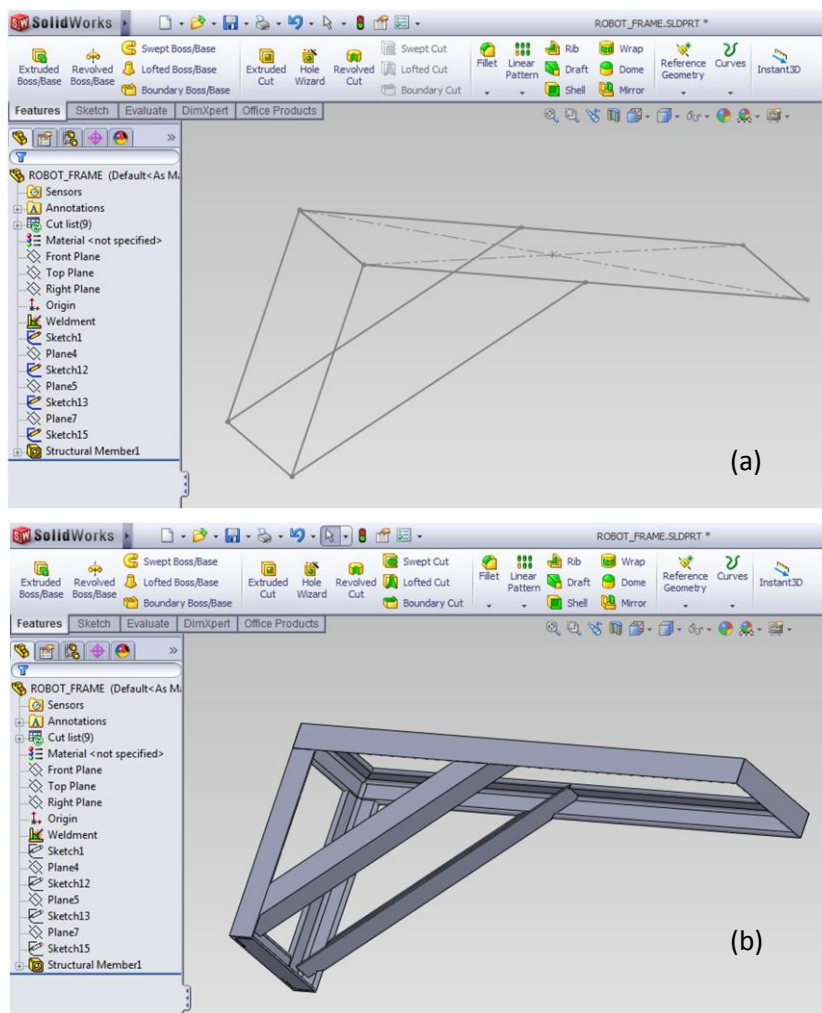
Modeling manipulator welded steel bracket with angle profile 35x35x5mm
